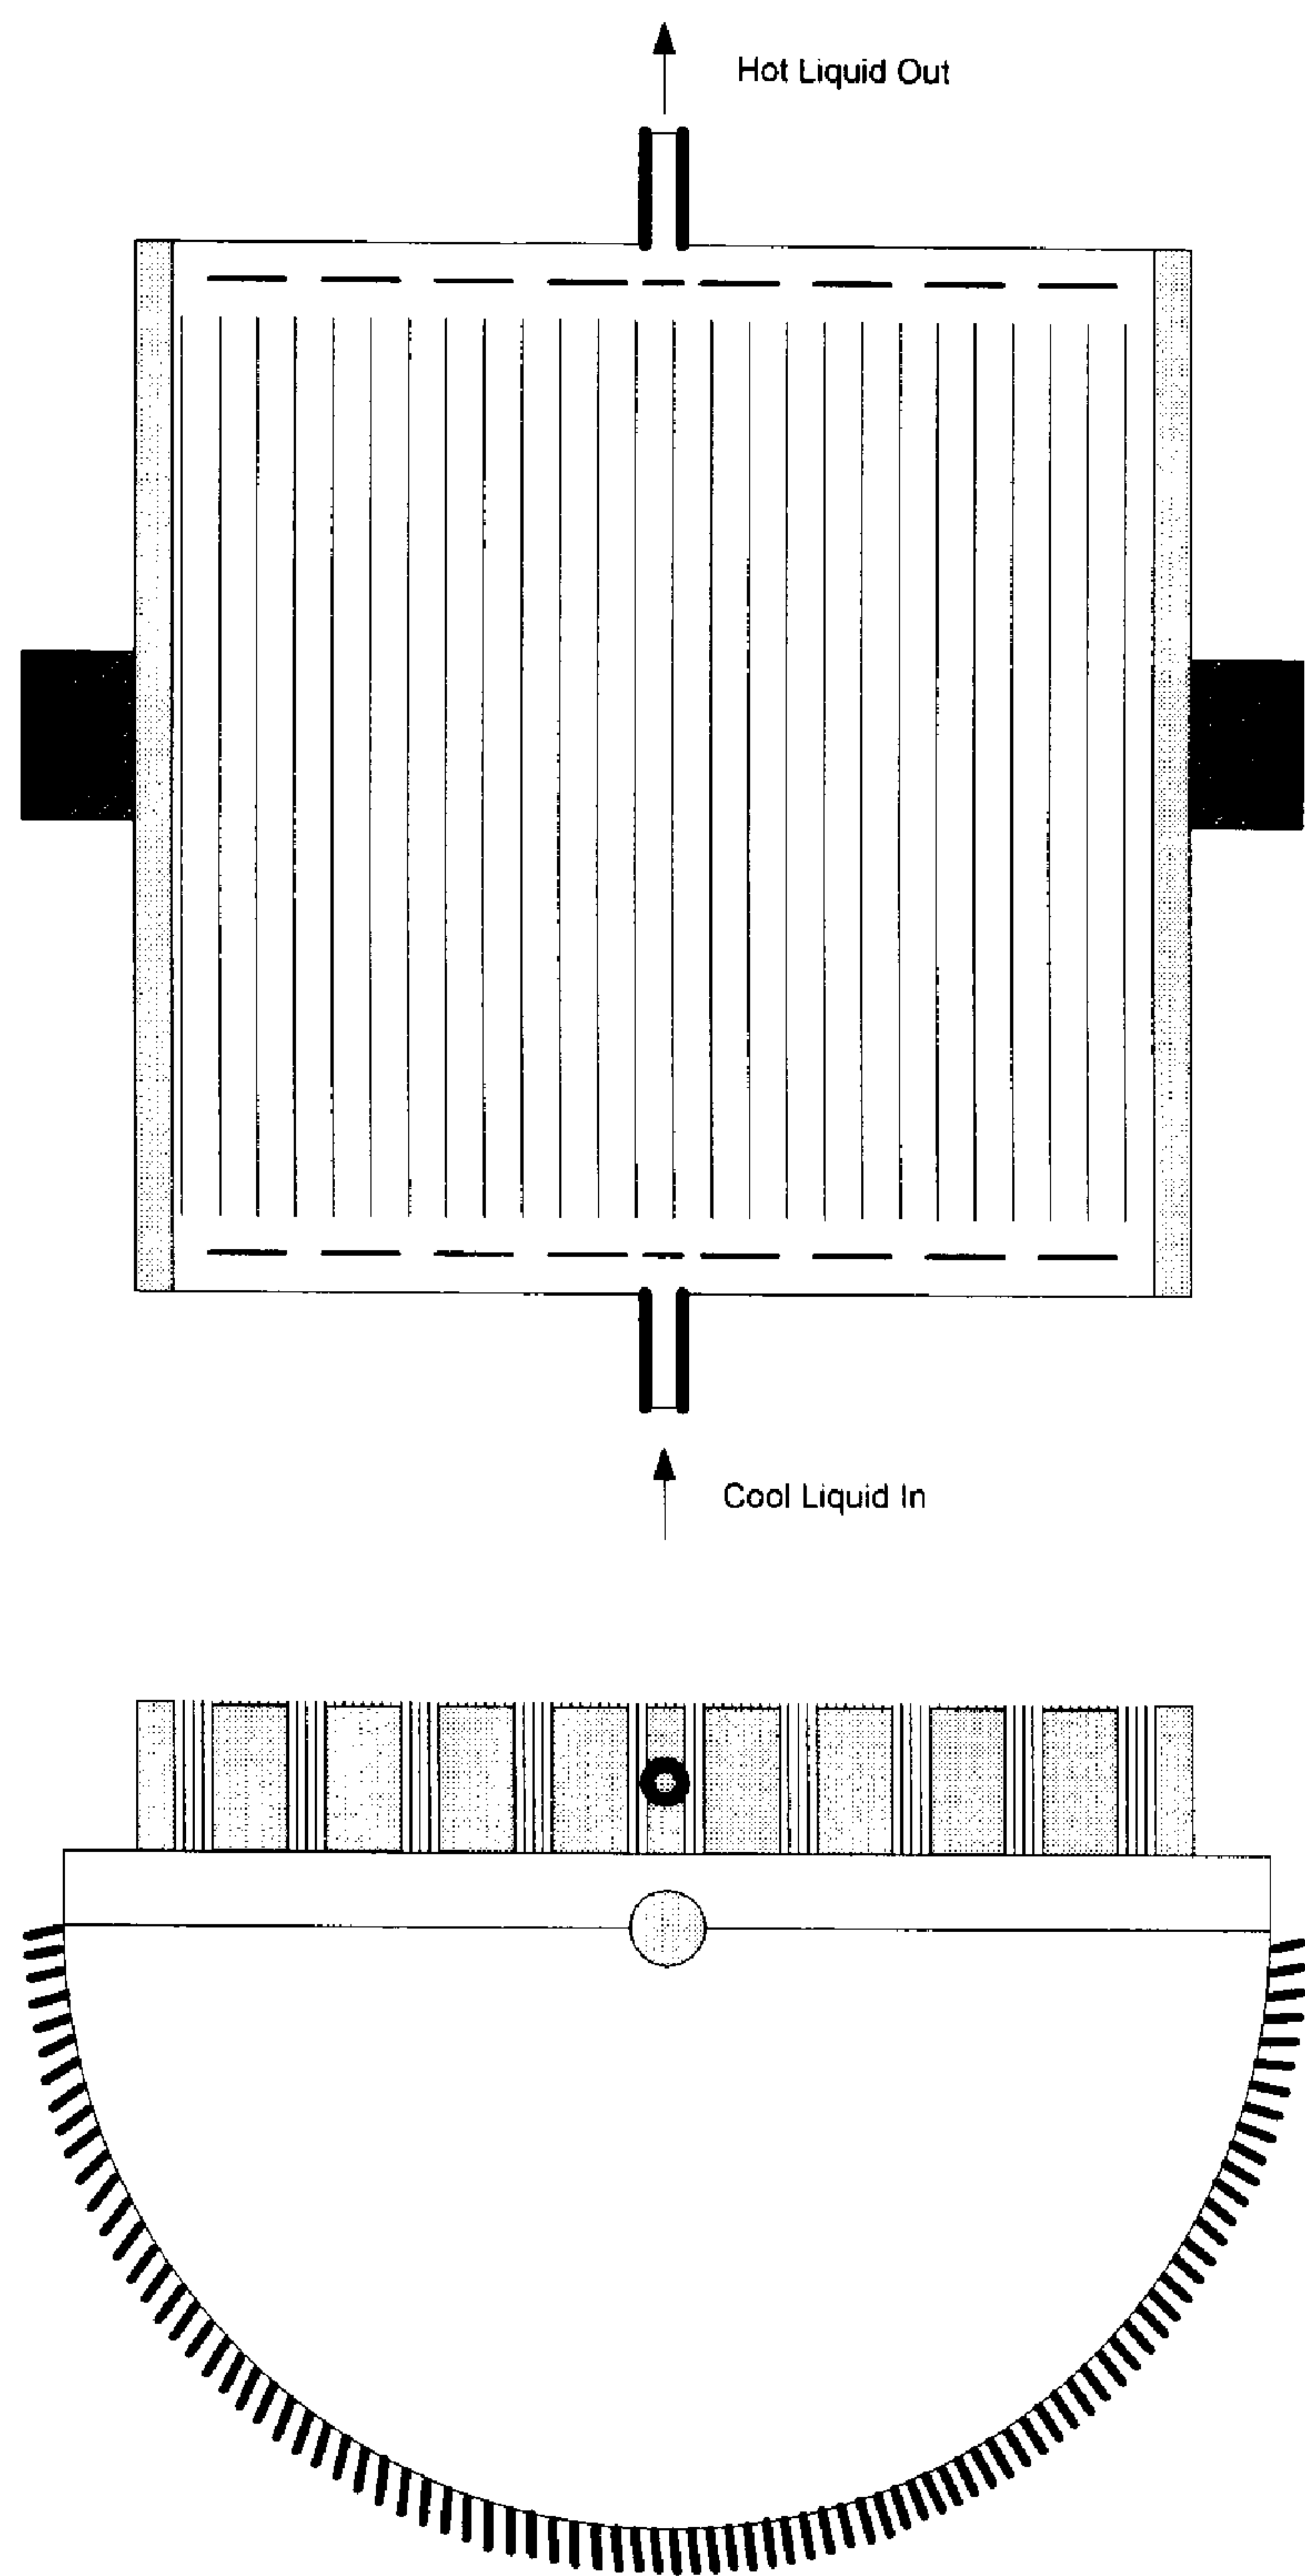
Cooling Subsystem Top View & Side View Mounted On Semi Circle Gear
